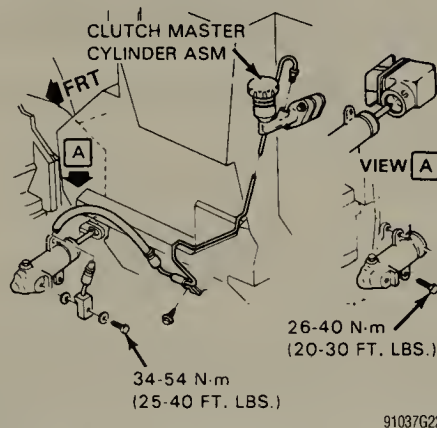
Exploded view of the clutch slave cylinder and related components—1984–88 vehicles
